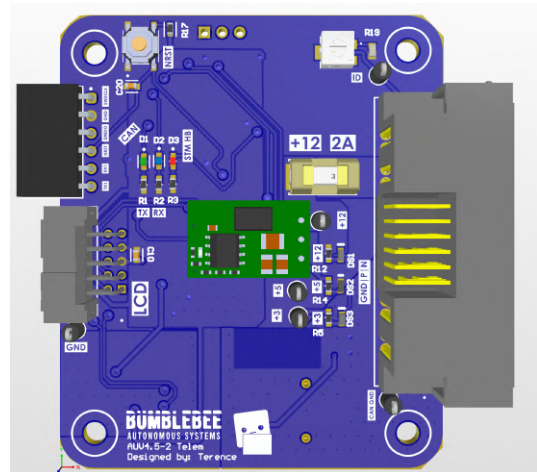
3D model of BBAUV 4.5 Telemetry Board.
